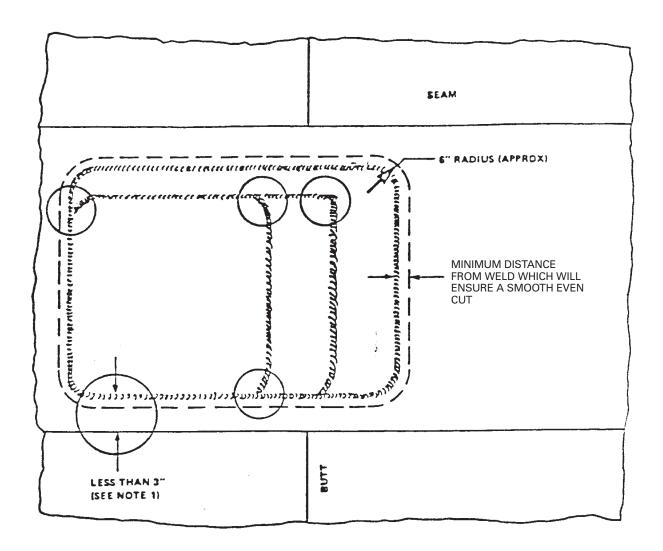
Example of Access Hole Intersecting Existing Welds
